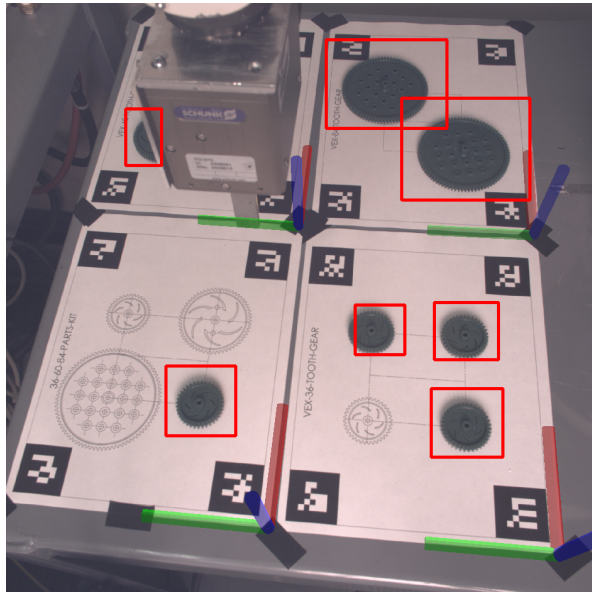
Vision subsystem identifying and locating parts trays and present gears.
